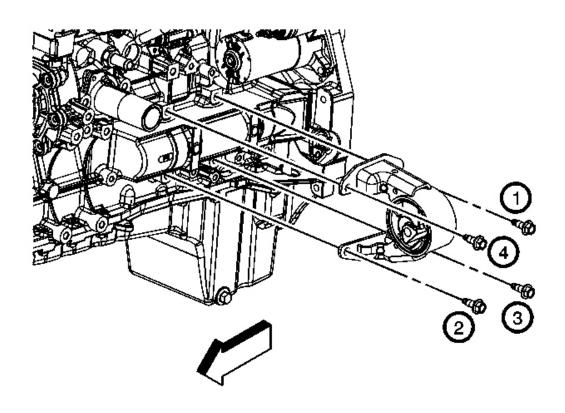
View Of Engine Mount Courtesy of GENERAL MOTORS CORP.
